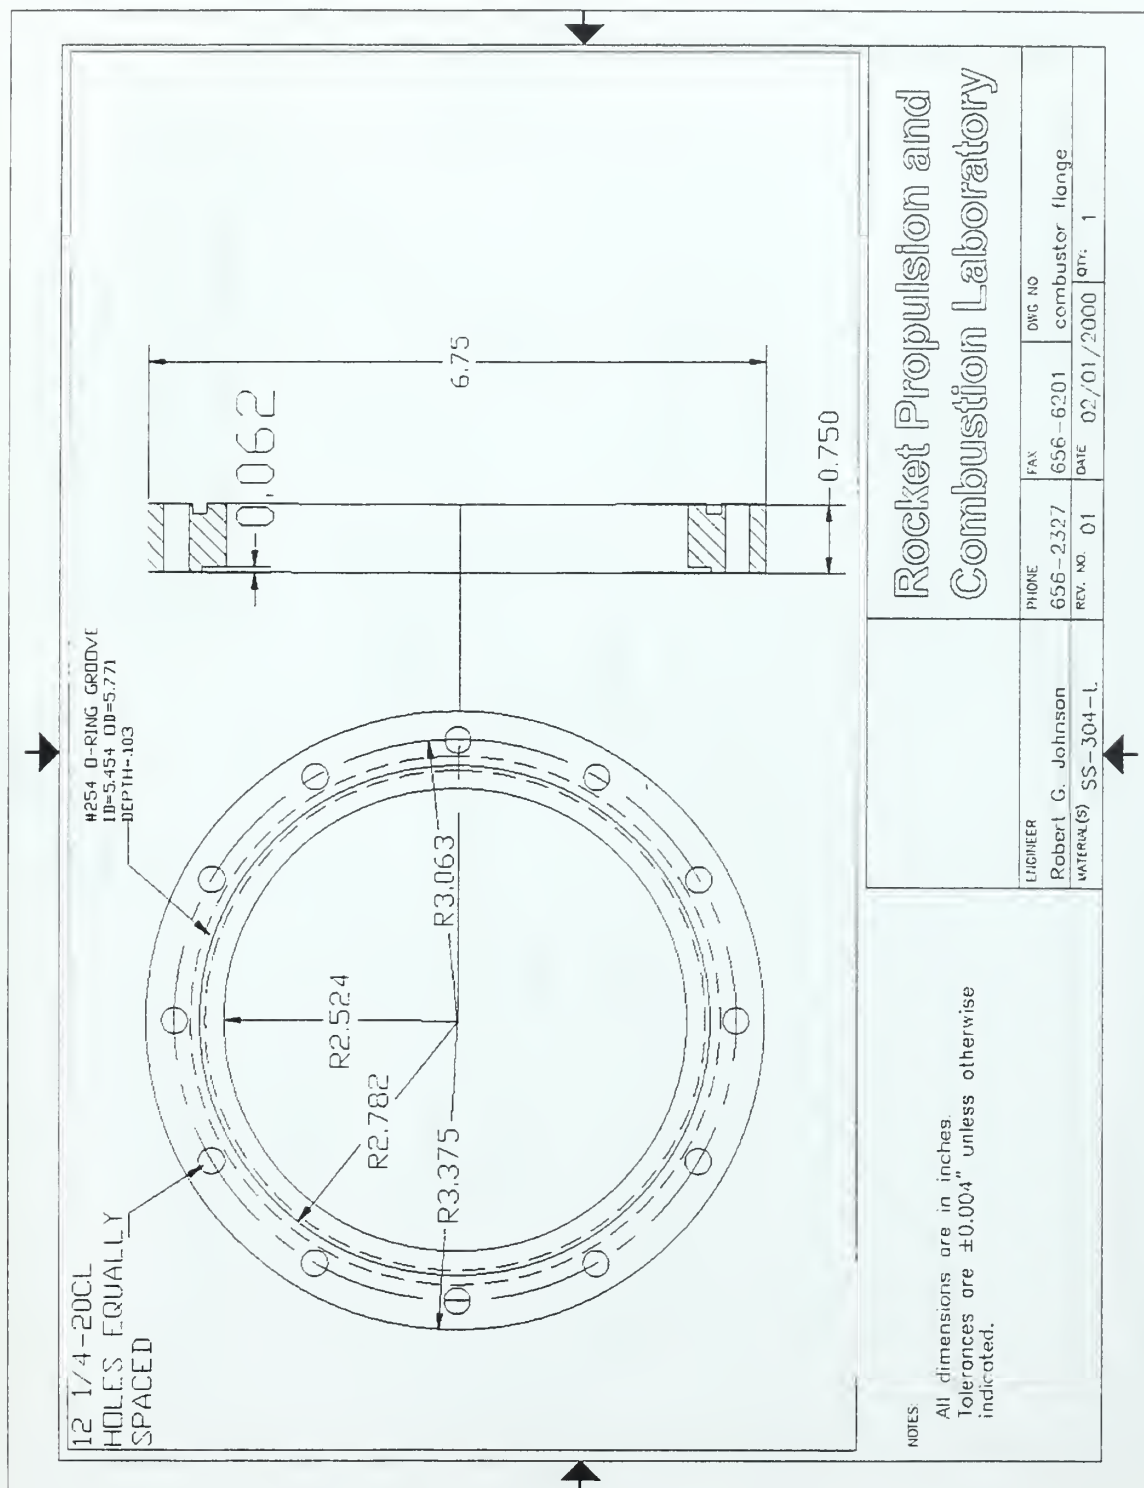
This flange was welded to the exit of the main combustion tube for possible peripheral use.
